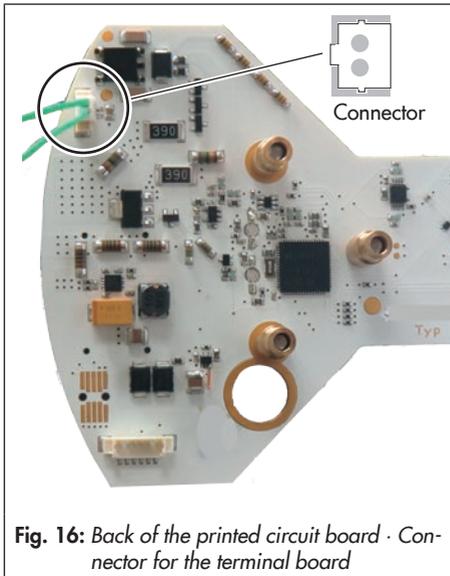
Back of the printed circuit board · Connector for the terminal board
